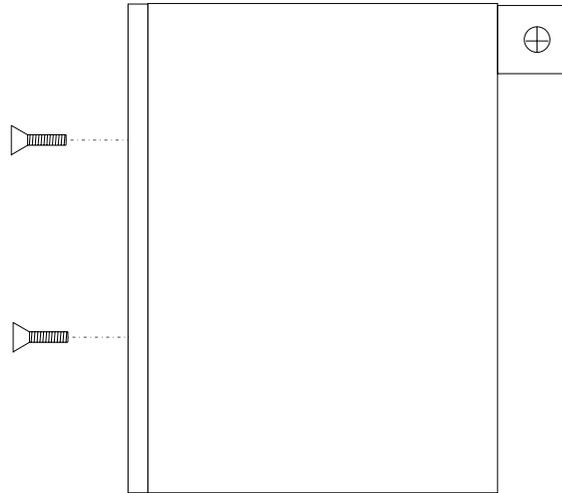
Location of Floppy Disk Drive Assembly Mounting Plate Screws
